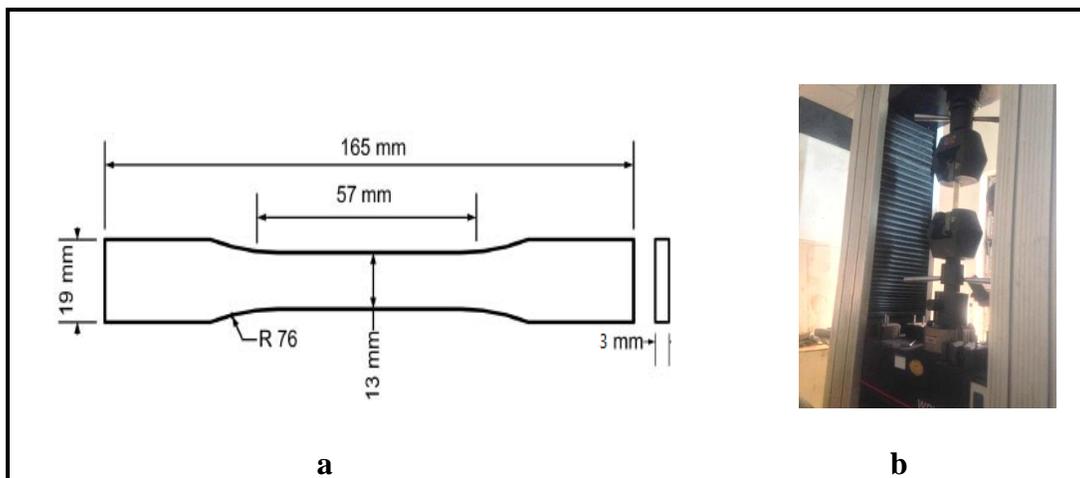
(a) dimensions of tensile test specimen (ASTM D 638-03). (b) tensile test machine.
